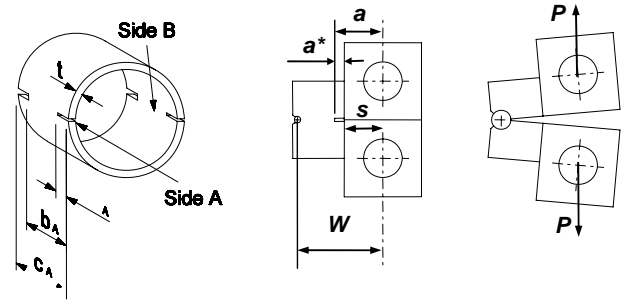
Specimen and specimen-fixture geometry for PLT testing:  $a^*$  = front notch (crack) in the specimen;  $S$  = dimensional parameter of the fixture;  $W$  = distance between the loading line and the rotation axis;  $a = a^* + S$  = crack length for specimen-fixture assembly
